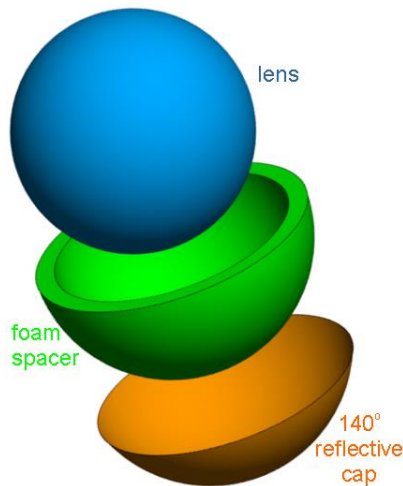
Exploded view of a spherical lens passive retro-reflector.
